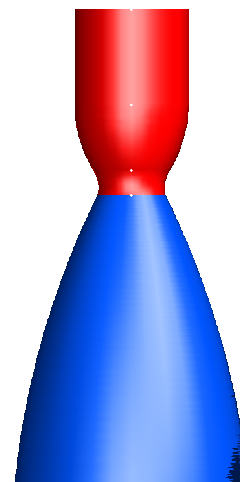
High heat-transfer combustion chamber and nozzle geometry of the proposed expander bleed-cycle engine (CAD rendering)
